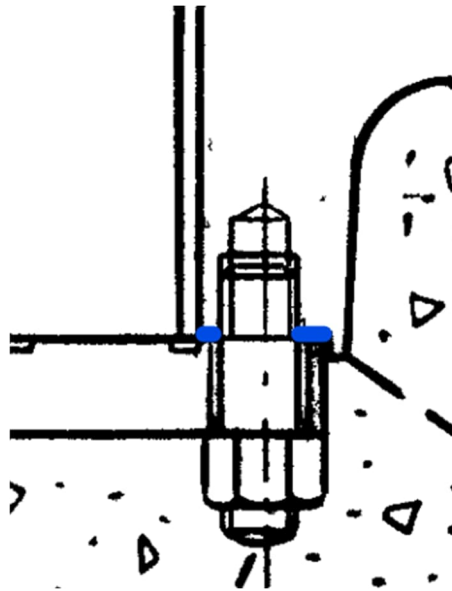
Stay Ring to Discharge Ring Bolted Connection
